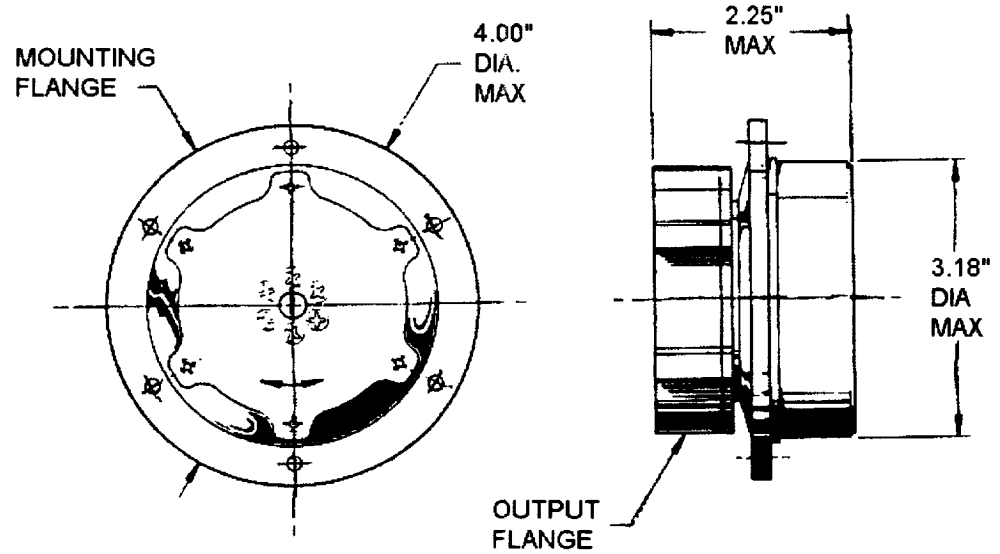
TYPE 2 STEPPER MOTOR EXTERNAL VIEW
